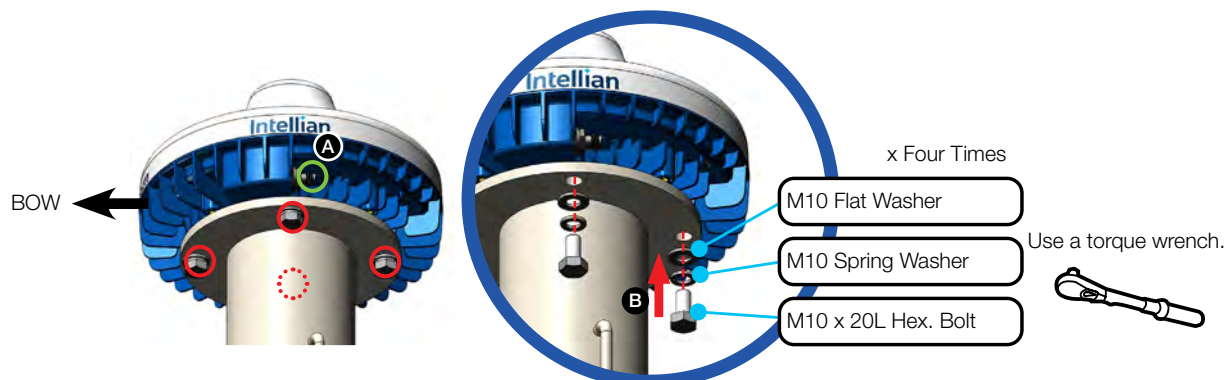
Mounting Antennas using Holes matching Iridium Pilot (with M10 Bolts)
